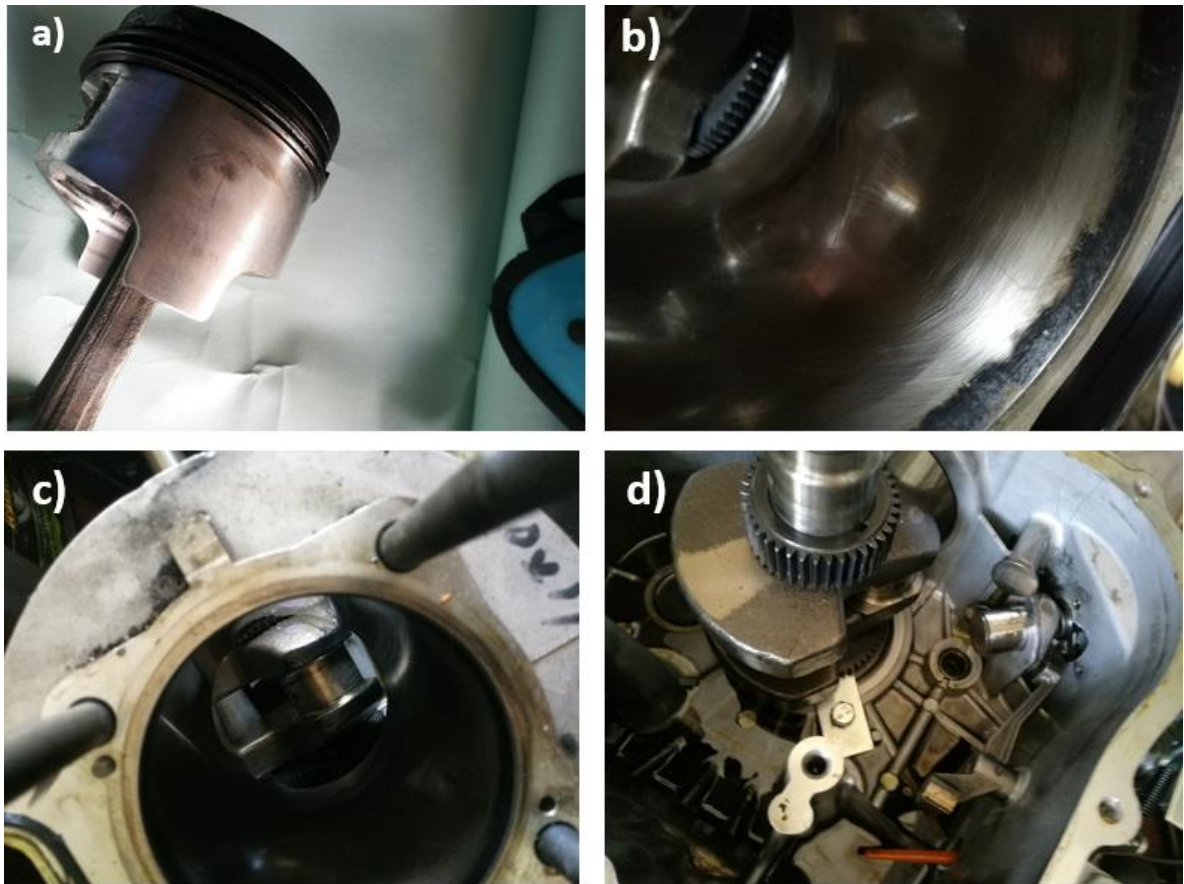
, Images of the main components of generator engine after dismantling for visual inspection showing not any damages to the engine components; a) piston assembly, b) cylinder bore at TDC, c) crankshaft big-end bearing journal, d) crank shaft main bearing journal with front timing gear attachments.
